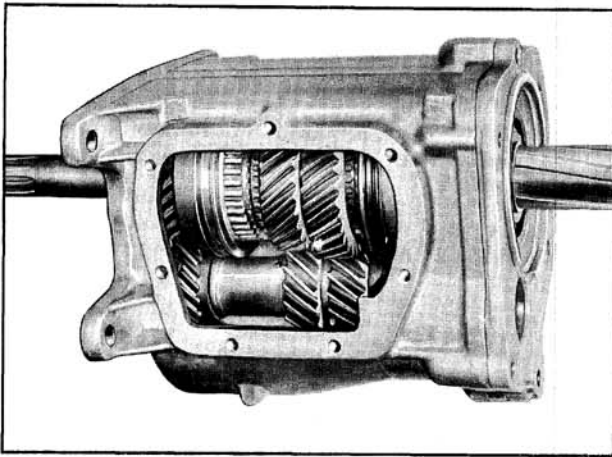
Third and Fourth Speed Synchronizer Clutch Sleeve in Fourth Gear Position
